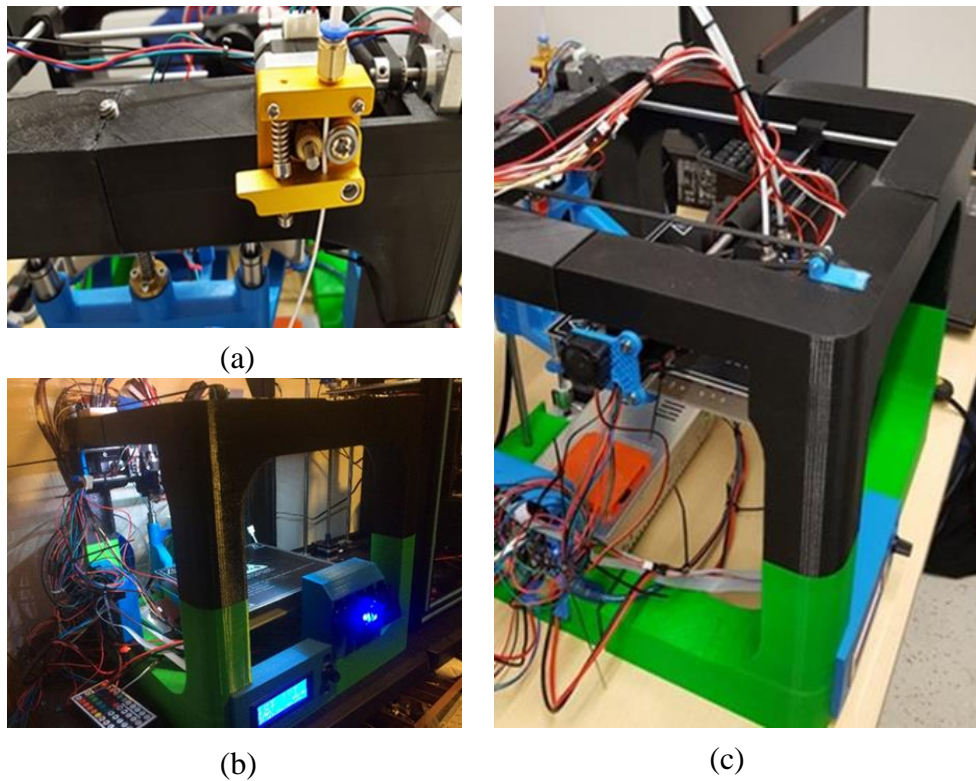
3D Printed printer frame (a) left extruder feeding filament (b) printing another frame, (c) motion system for the printing head
